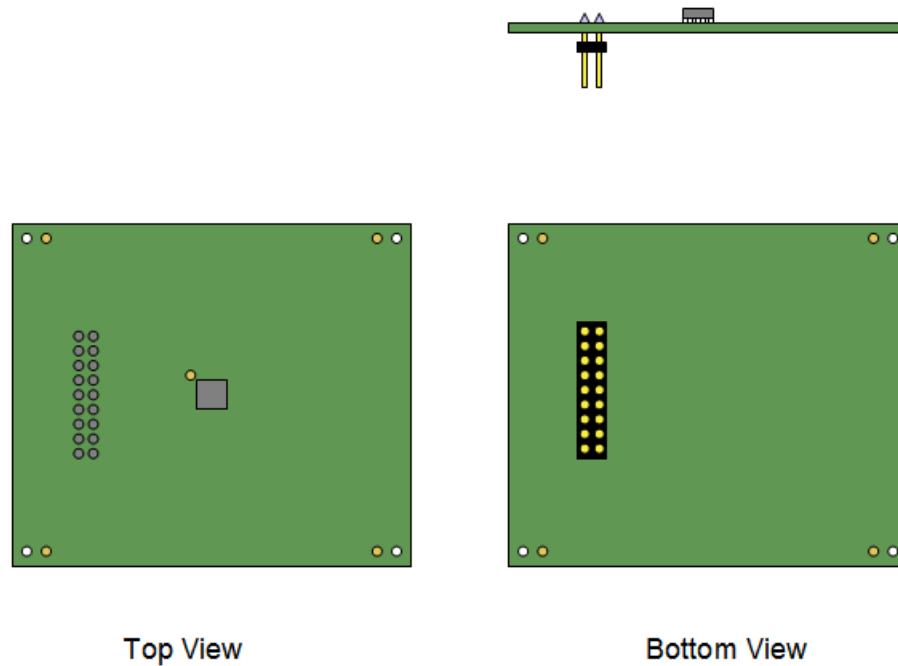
Configuration of a Through-hole-type Adapter Test Board
